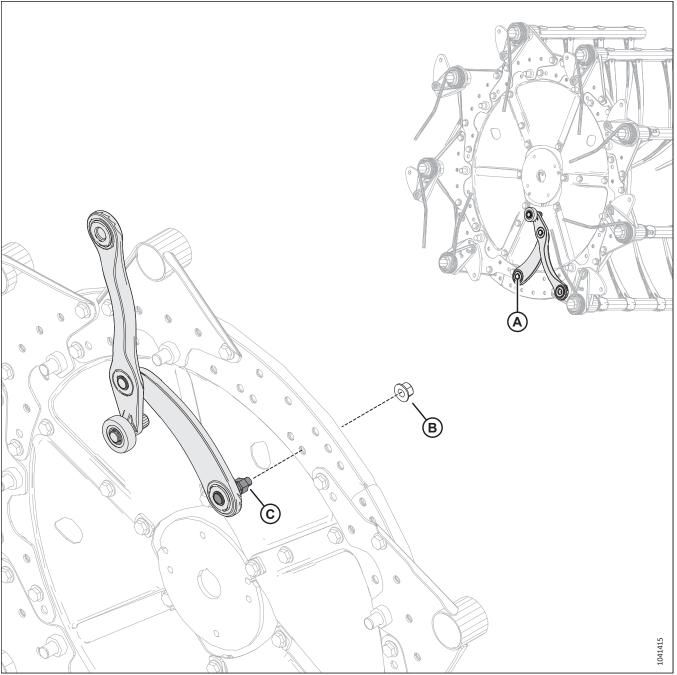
Cam Linkage Associated with Removed Tine Tube
